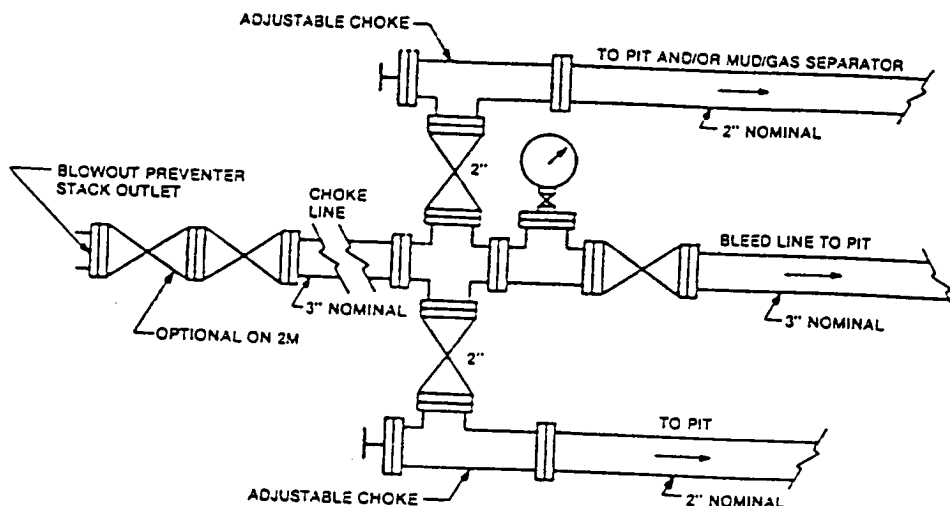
Typical choke manifold assembly for 2M and 3M rated working pressure service — surface installation.
